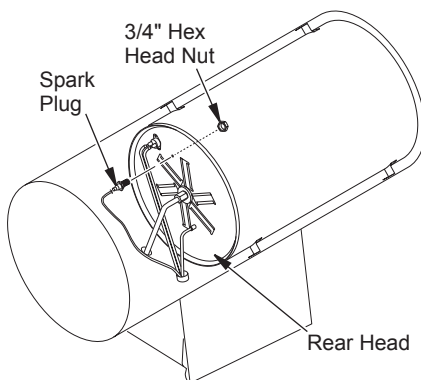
Removing Spark Plug Nut and Spark Plug (Heater may vary from illustration)
